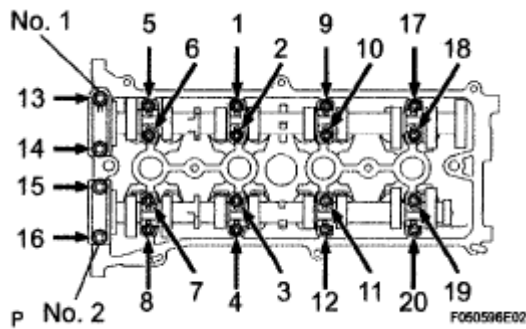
Identifying Bearing Cap Bolts In Sequence
